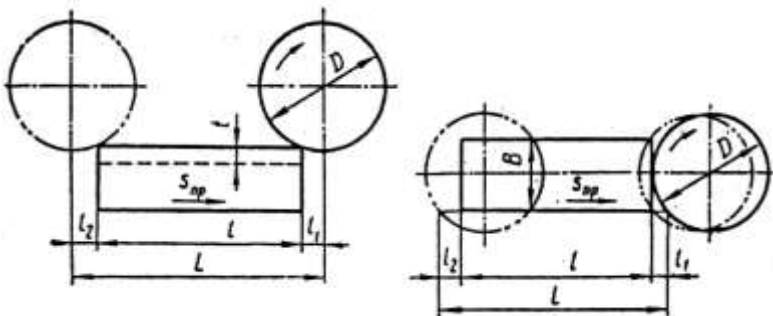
Determination of calculated length of a workpiece in plane (a) and face (b) milling
